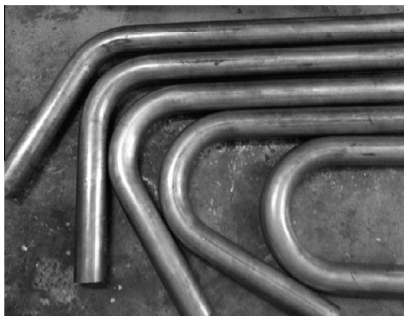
Production of bending forming of welded tubes.<sup>28</sup>
